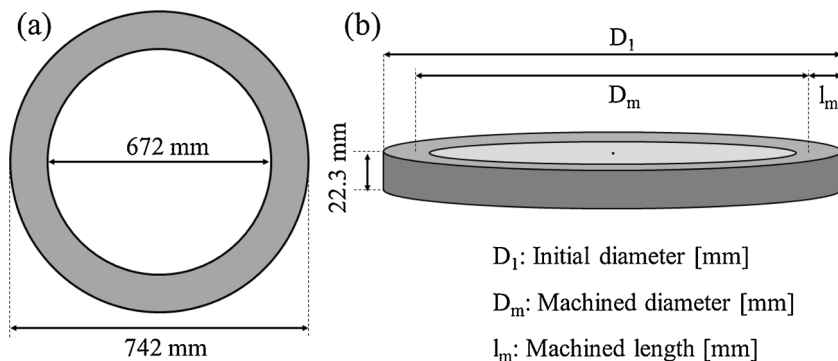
(a) Top view (b) Side view of the ring with dimensions extracted from [14].
